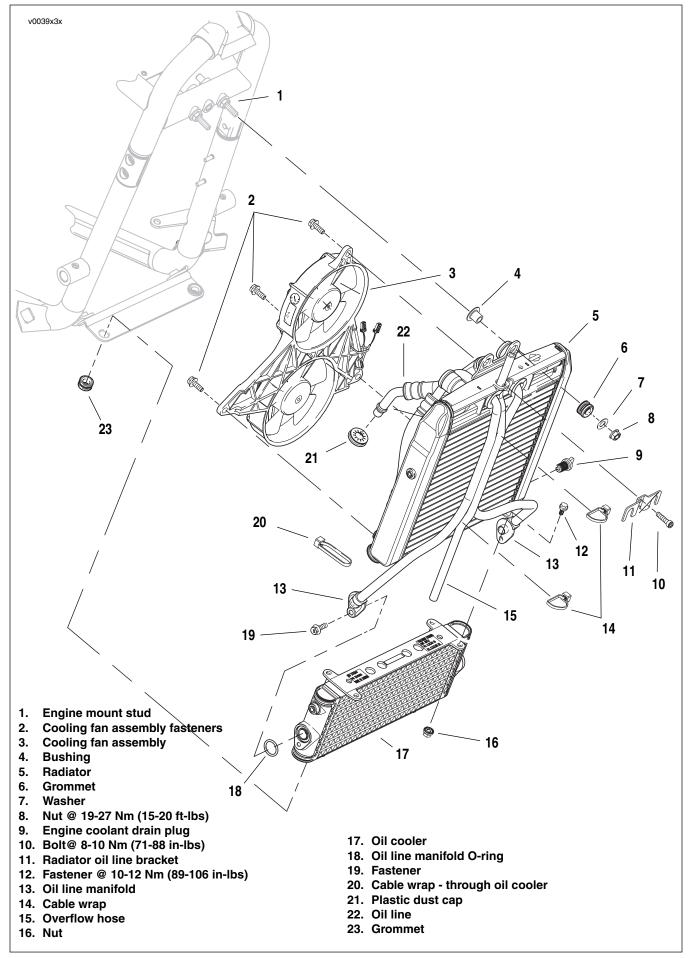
Radiator/Oil Cooler Assembly (typical) (VRSCA shown)
